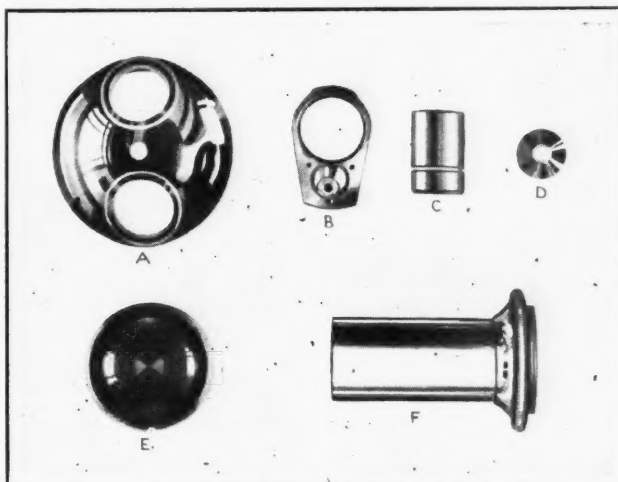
Parts turned or faced in Lathes employing Diamonds as Cutting Tools
